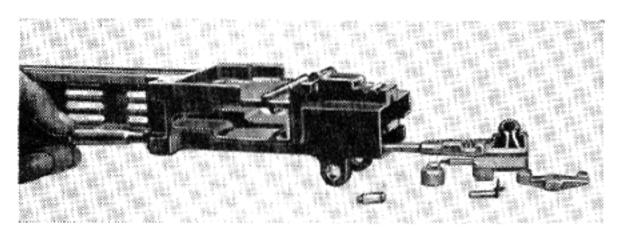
Removal of firing assembly of ZB-80 Powerdriven Machine Gun.
